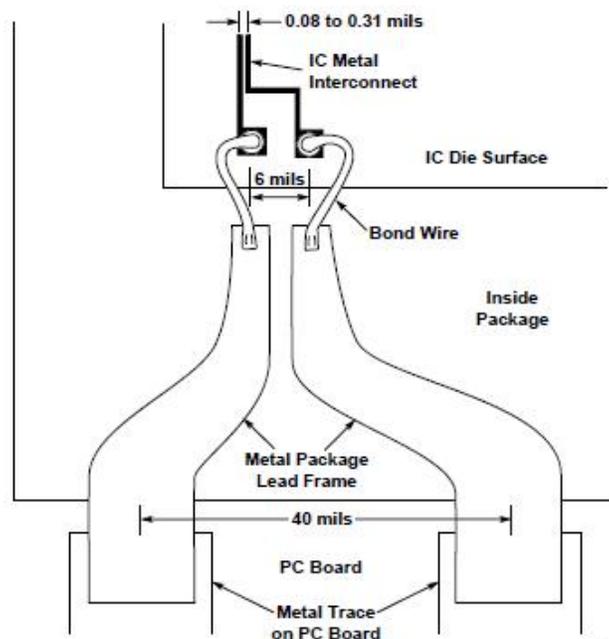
IC Chip to PCB Lead Spacing
